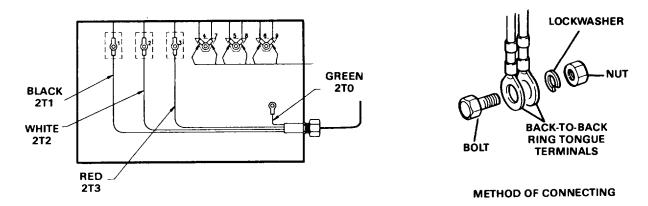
Distribution Pump and Motor Assembly (sheet 2 of 5)
